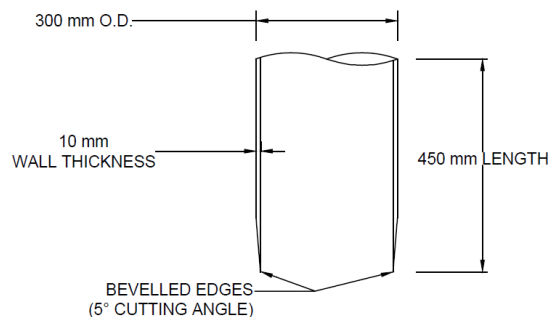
Dimensions of Custom-Made Large Diameter Steel Tube.
